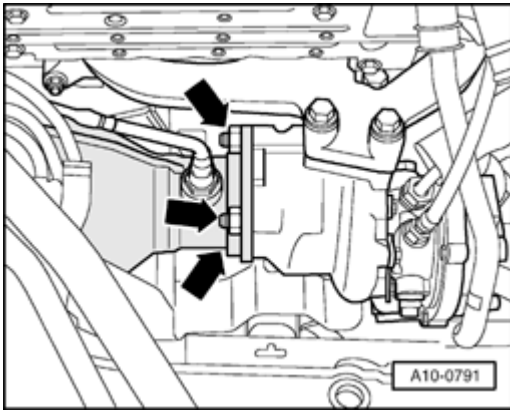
Removing Bolts Securing Turbocharger To Catalytic Converter
